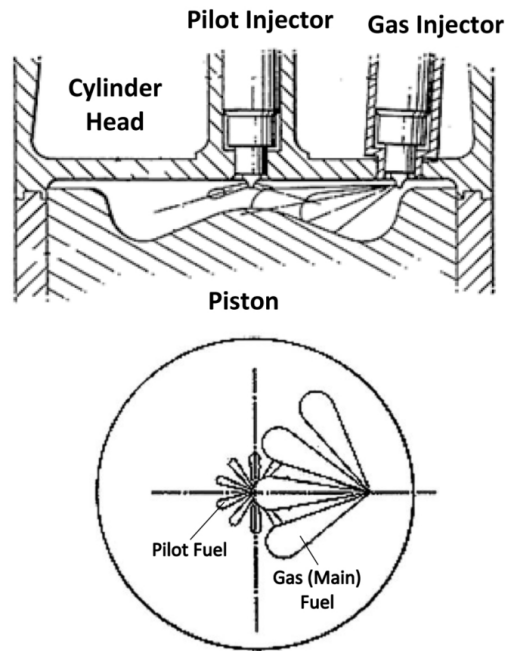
The “H-Process” side-mounted gas injector engine combustion chamber layout [105]
